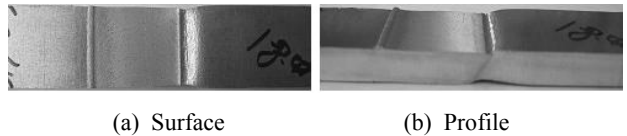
Fractured configurations after tensile test with Al6061-T6
